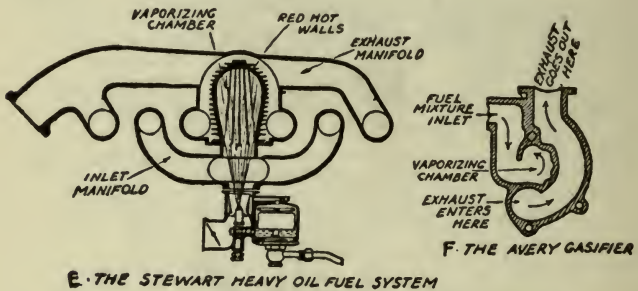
E.—THE PRINCIPLES OF THE CARBURETOR
